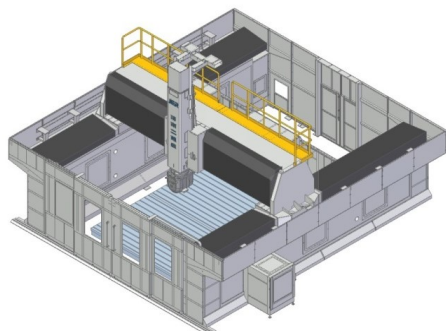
Viaduct type five-axis gantry boring and milling machining centre
